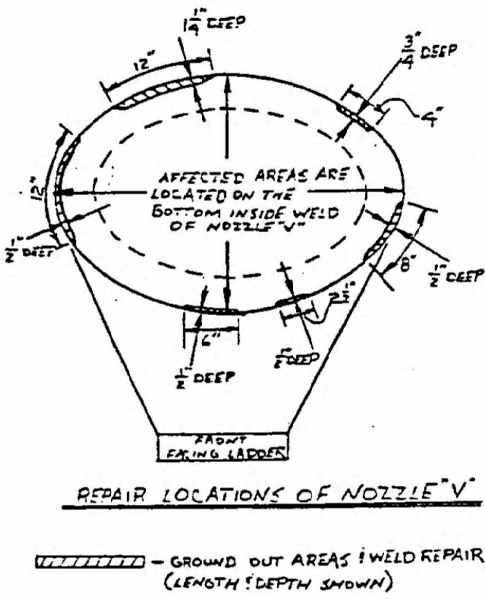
Repair drawing for Nozzle V of the LOX tank [26].
